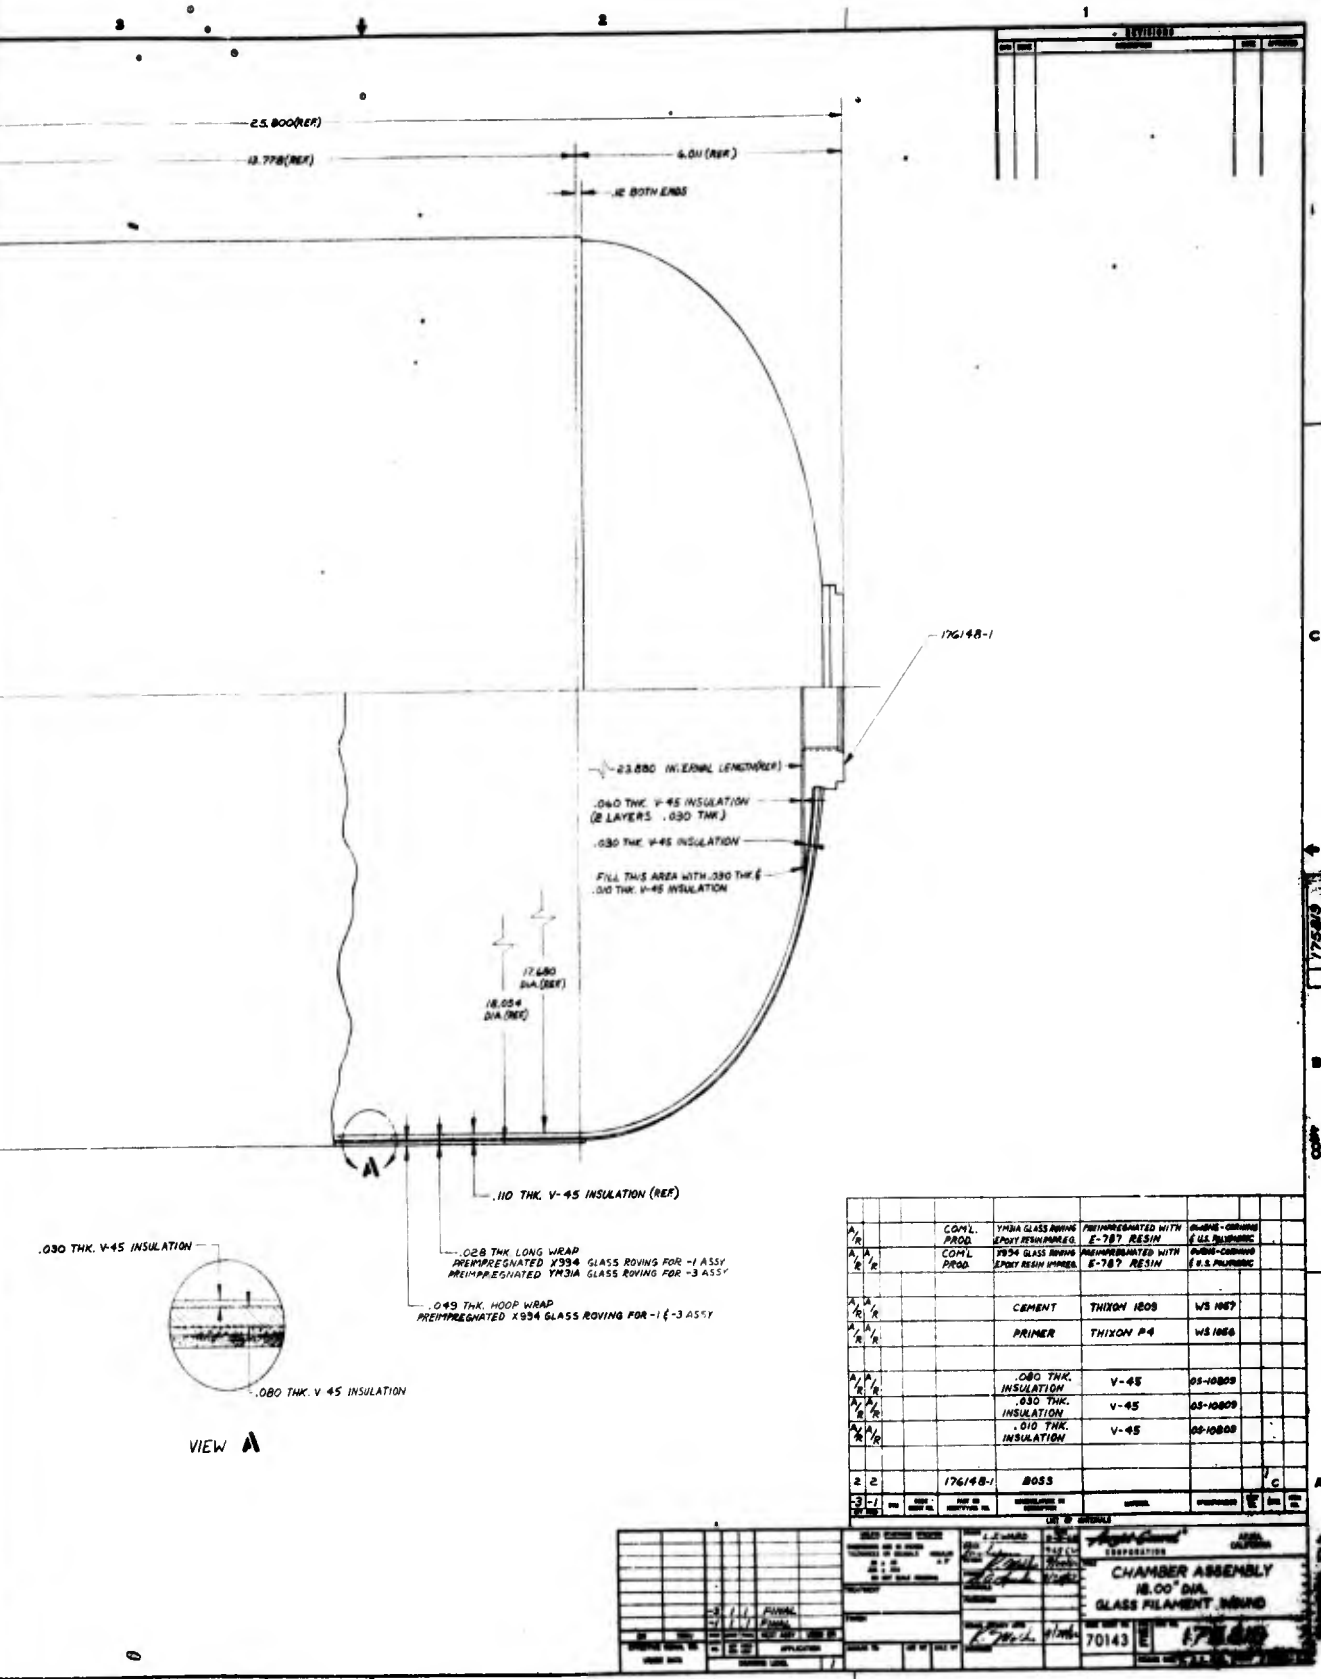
18-Inch Chamber Assembly, Serial Nos. 3 and 4
